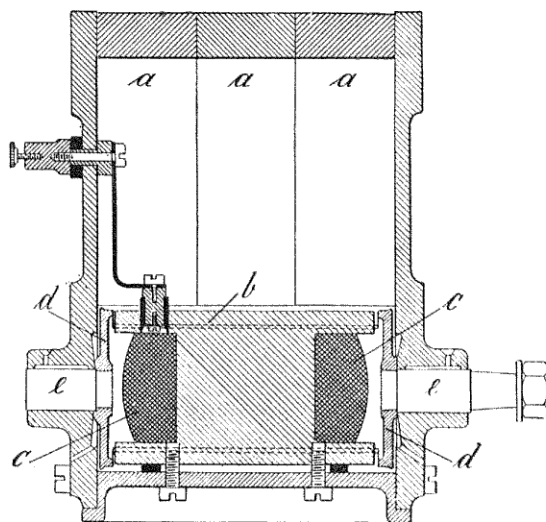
a*, Horse-shoe magnet ; *b*, I-shaped armature ; *c*, Wire coil winding ; *d*, End of rocking shield ; *e*, Spindle for shield.
